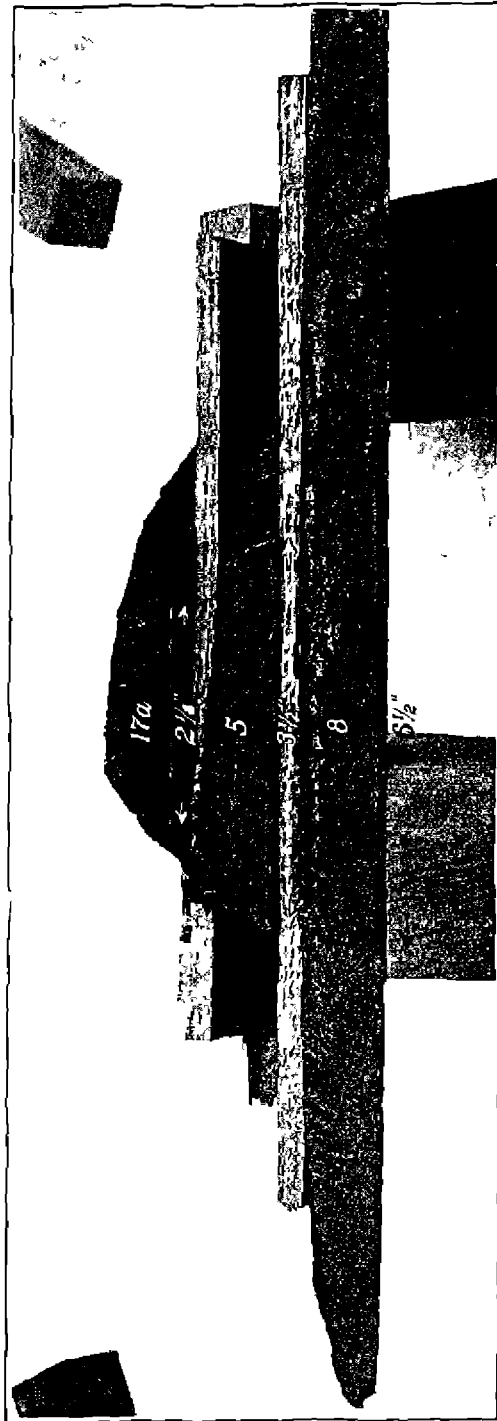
Appearance of fractured surface of Hange 8 and two others. Each fractured surface displayed one or more laminated seams.
